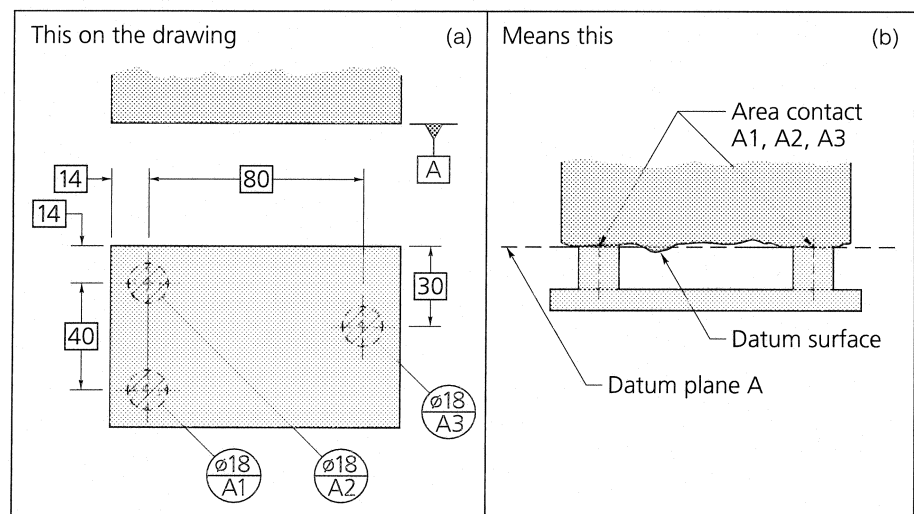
The Primary Datum Established by Three Area Contact Positions
